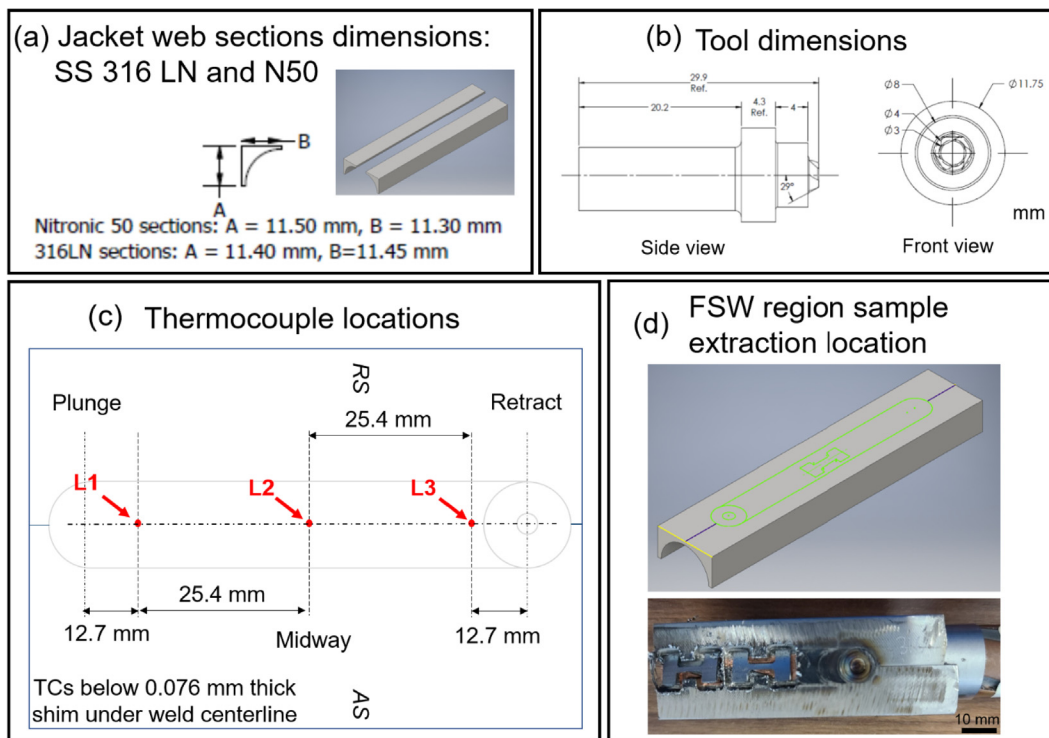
(a) SS 316 LN and N50 jacket web dimensions, (b) dimensions of the tool used, (c) thermocouple locations for temperature measurements during the FSW run, and (d) schematic showing the region of mini-tensile sample extraction from the weld.
